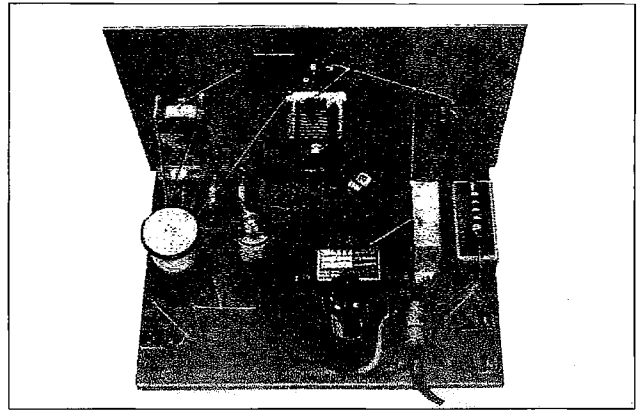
Photo F. Construction technique of routing bare wire between connect points. Heavy-gauge wire was used to maintain mechanical separation and support.
